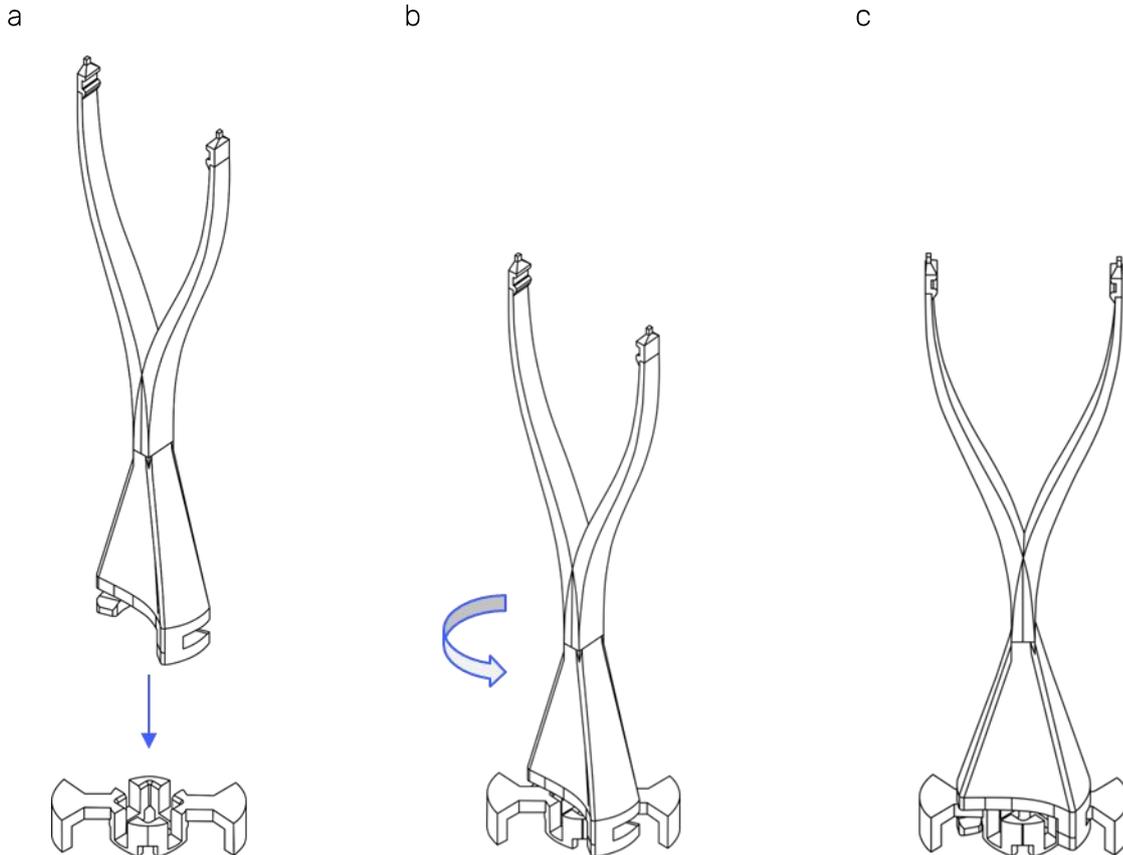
Inserting the handling tool into the frame (a), attaching the handling tool to the frame (b & c).
